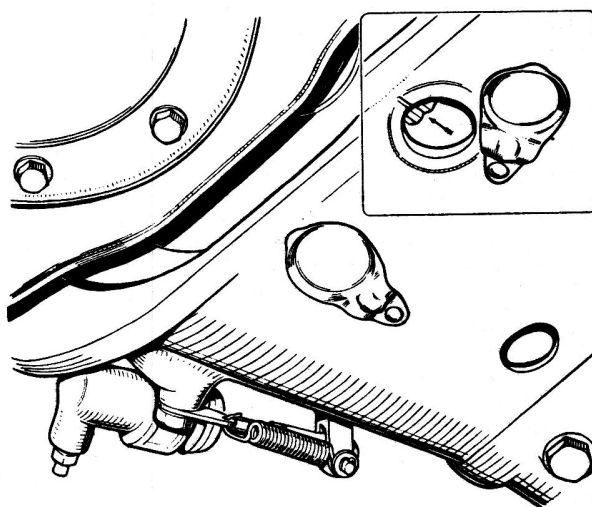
Ignition timing marks on flywheel and clutch housing
